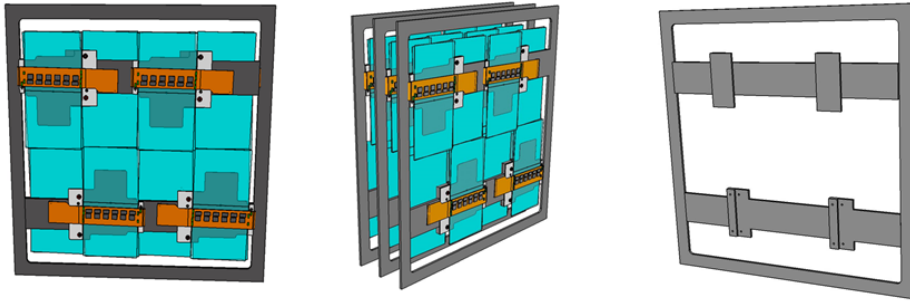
Left: Module frame with a tracker plane mounted inside. Center: Three module frames assembled into a tracking station. Right: The module frame itself (holes for alignment and attachment are not shown).
